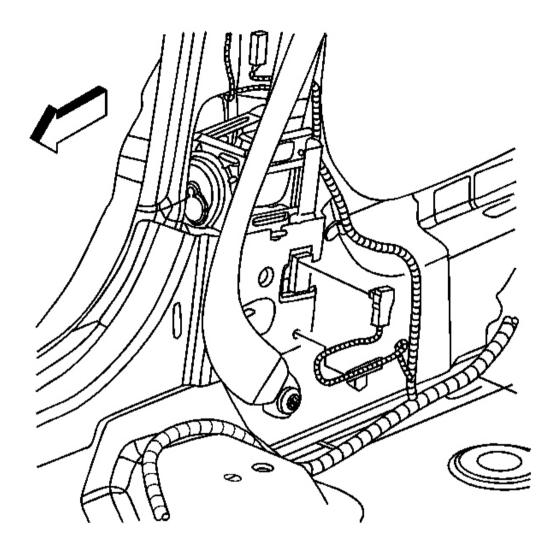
View Of Seat Belt Wiring Harness Routing Courtesy of GENERAL MOTORS CORP.
